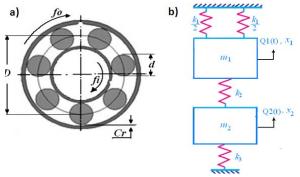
a) Cross section of test bearing b) Physical model of bearing system
